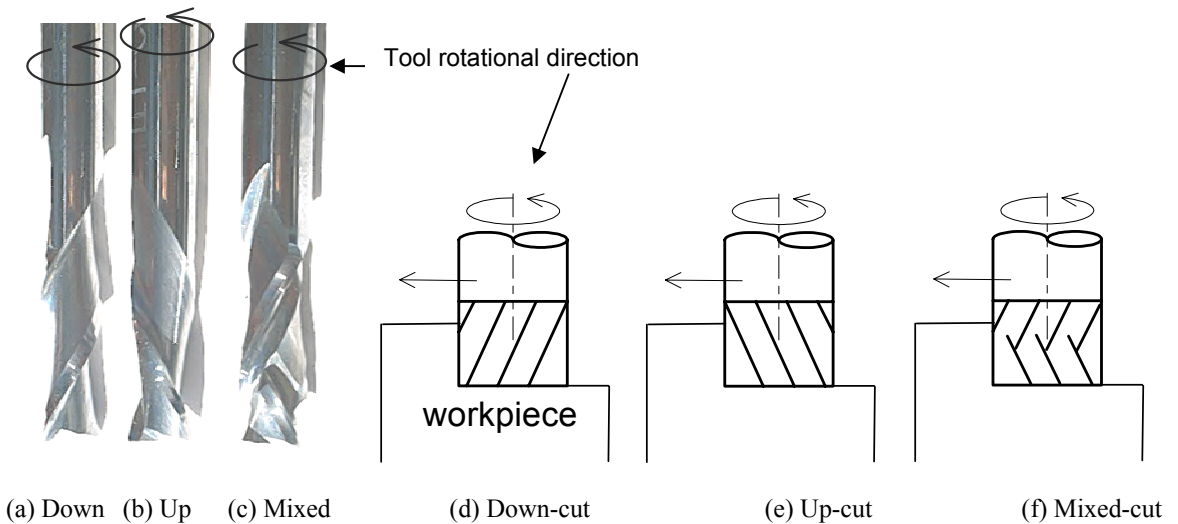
Up-, down-, and mixed-cut end mills: (a) down-cut end mill, (b) up-cut end mill, (c) mixed-cut end mill, (d) down-cut end milling setup, (e) up-cut end milling setup, and (f) mixed-cut end milling setup.
